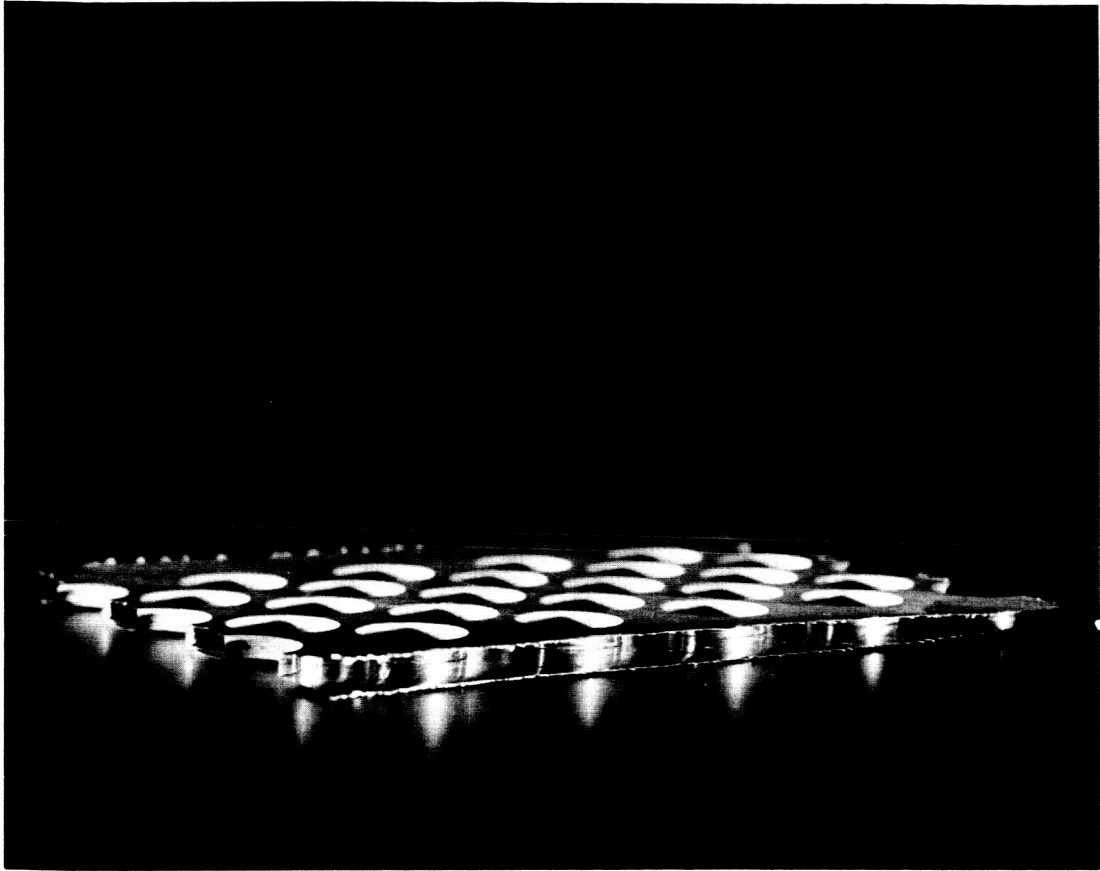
SUBSTRATE CONSTRUCTION — HOLLOW CORE STRUCTURE
